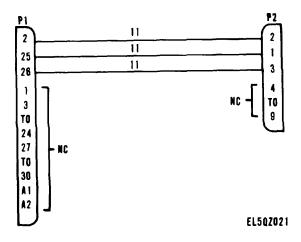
Cable Assembly, Special Purpose, Electrical 217-803023-000(4W3), Wiring Diagram.
